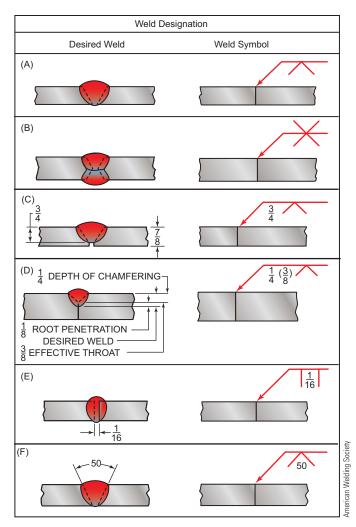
Designating groove weld location, size, and root penetration.
